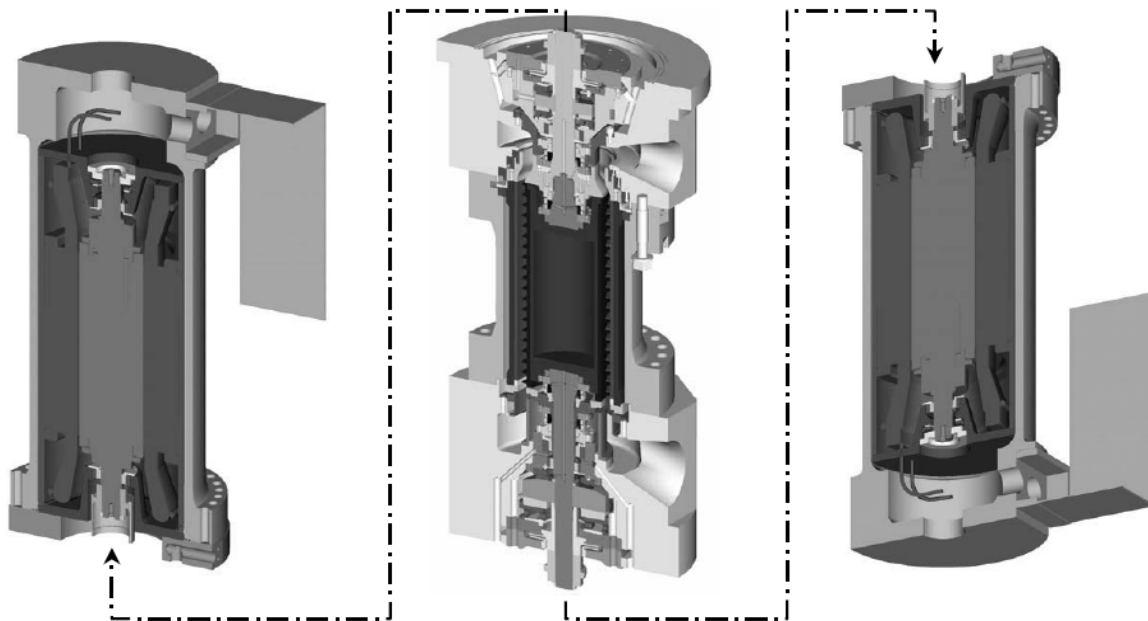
Cross section of Left; upper motor, Centre; hydraulic section, Right; lower motor
